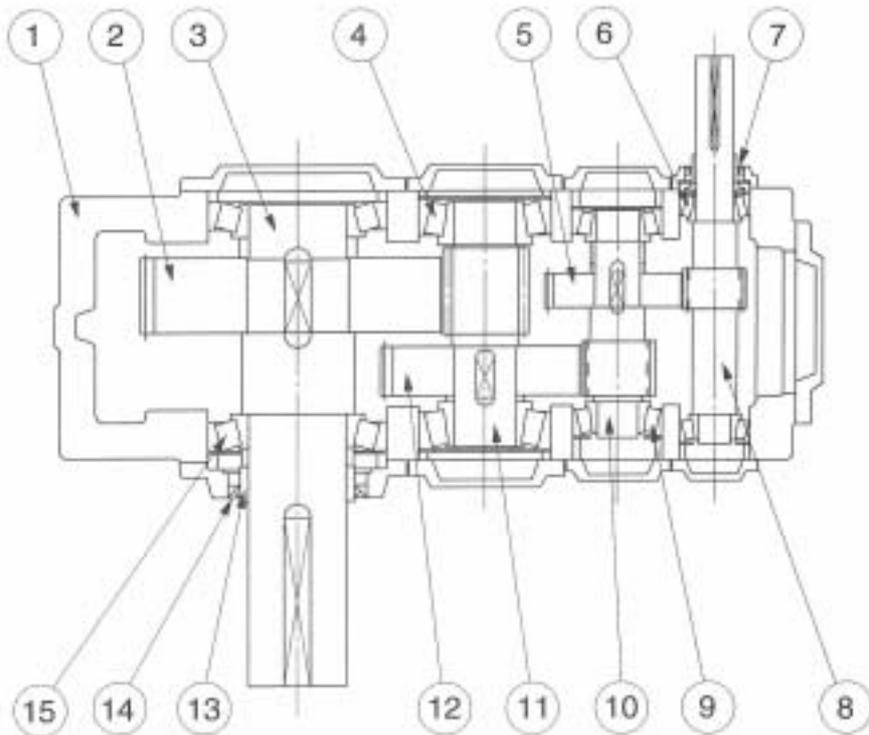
Solid parallel shaft horizontal type 3 - stage unit
